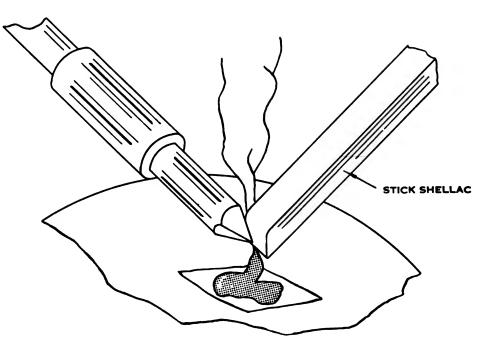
Repairing surface defects with stick shellac and soldering iron.
